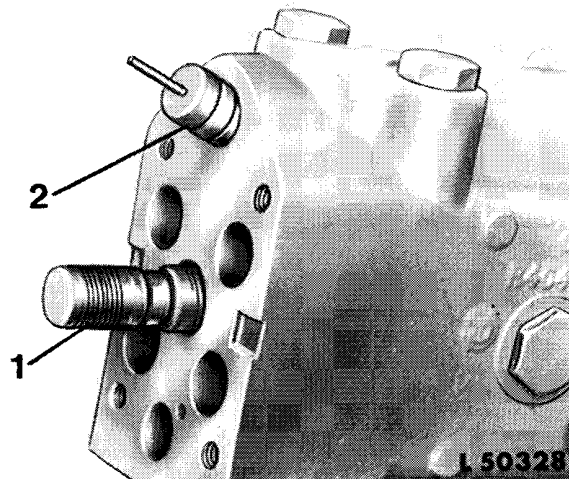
Removal of Flow Control Valve and Detent Piston
